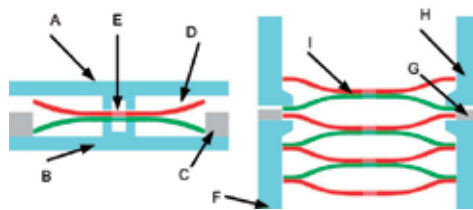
(A) upper welding electrode, (B) lower welding electrode, (C) centering coil, (D) two foil pieces, (E) hole for air passage, (F) lower welding electrode with undercut, (G) centering coil, (H) upper welding electrode with undercut, (I) foil segments from first step
